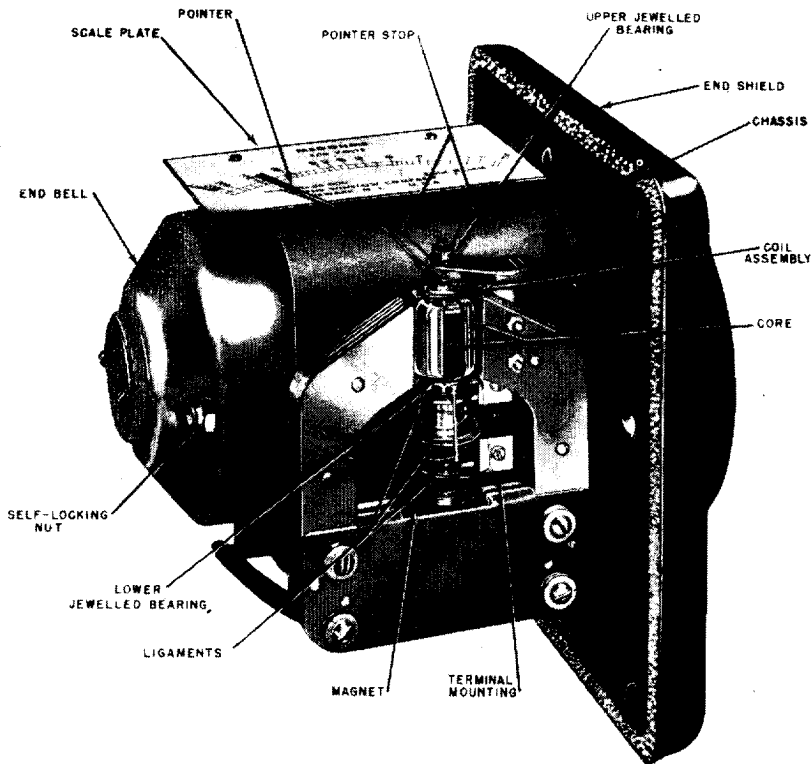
Test set I-48-B with end shield and chassis removed from case.
